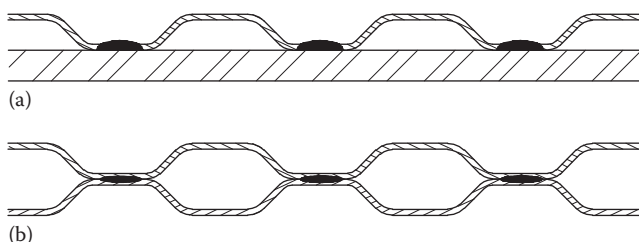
Welded dimpled jacket template. (a) Gas metal arc welded and (b) resistance welded.
